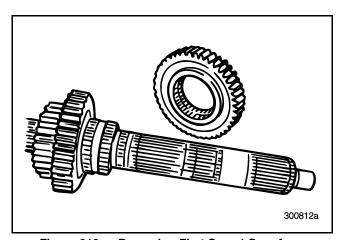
Removing First Speed Gear from Mainshaft (T313L/T318L Shown)
